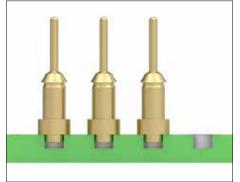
Transparent view of MM 2956-0 soldered into blind via holes on PCB for stability.
